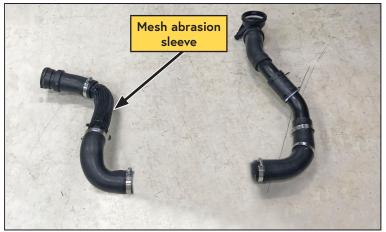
Radiator side anti-abrasion sleeve (Coolant assembly removed from vehicle for clarity)
